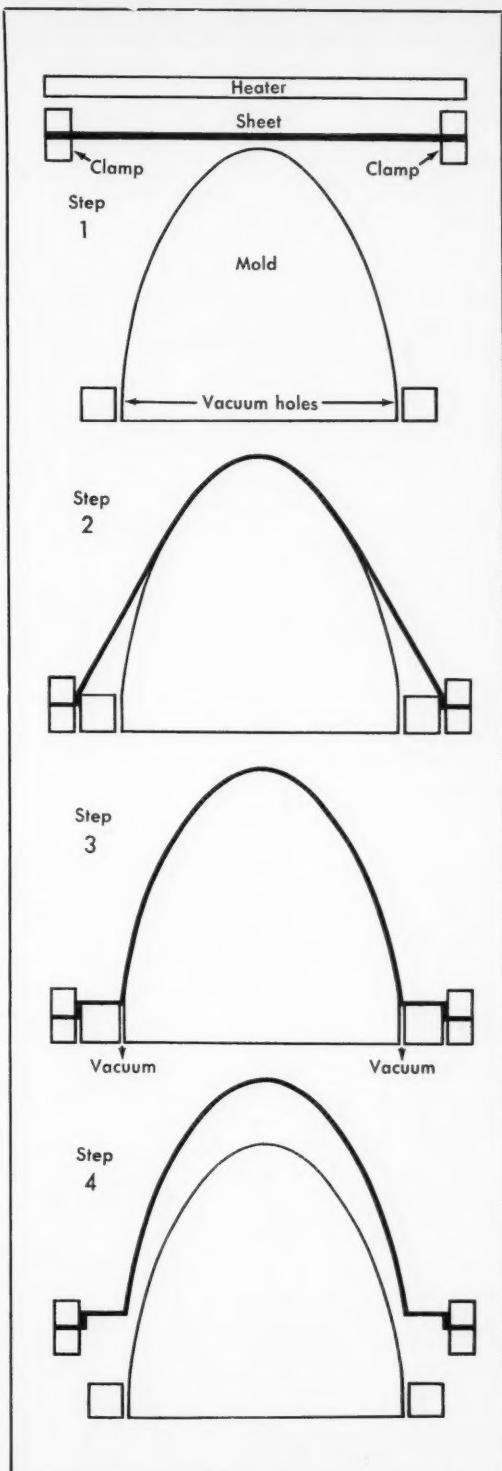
Four stages in vacuum forming. (1) The plastic sheet is clamped in a frame and heated over the mold. (2) Heater is removed and frame brought down. (3) The vacuum is turned on, drawing the sheet to the mold. (4) The finished piece is lifted off the mold.
